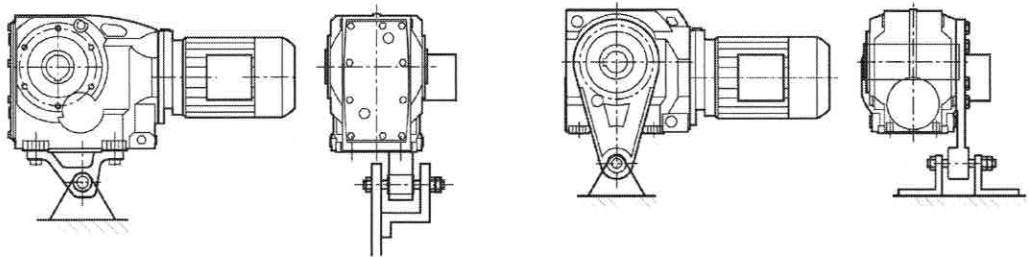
Mounting suggestion for torque arm on foot and flange
